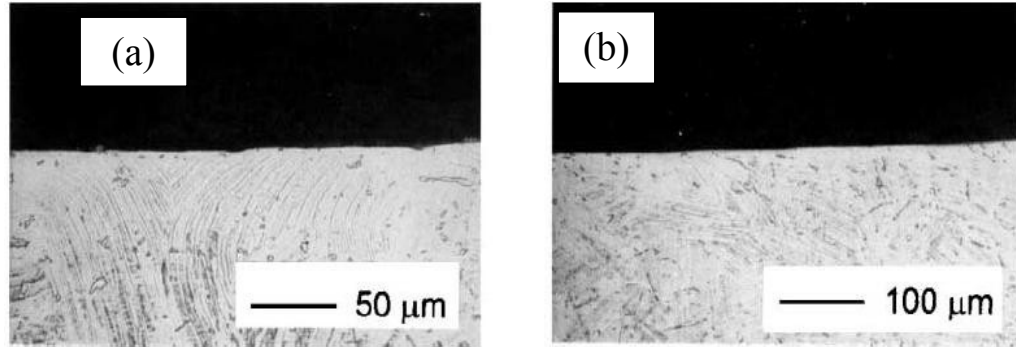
Cross sections of the machined workpiece surface, $v=70\text{m/min}$, $d=(a) 0.1\text{mm}$, (b) 0.2mm , $f=0.06\text{mm/tooth}$, dry, flank wear $=300\mu\text{m}$, 45° when ball nose end milling [106]
